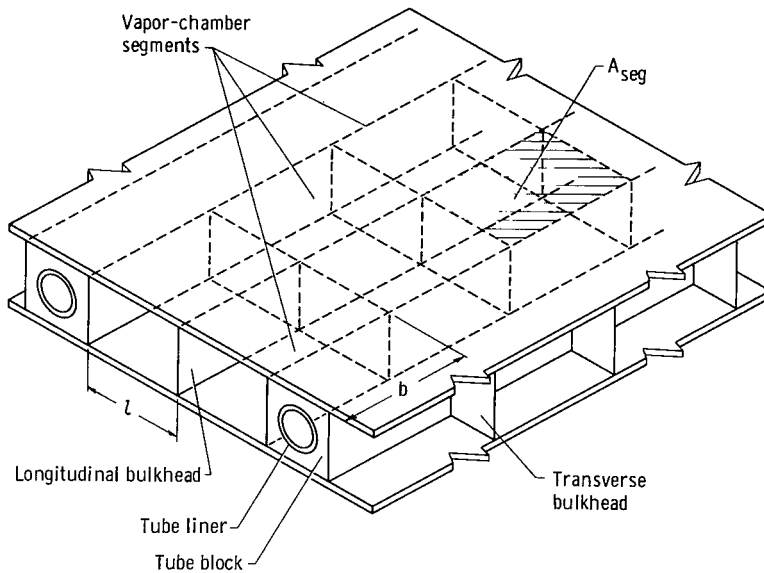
Isometric drawing of vapor-chamber fin-tube configuration.
